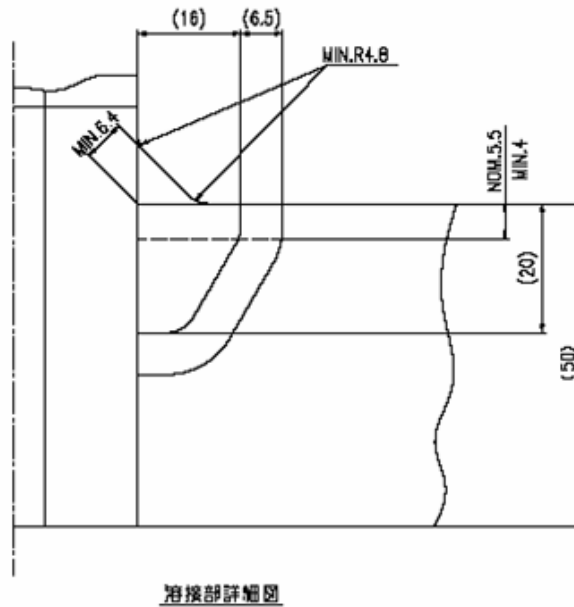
Seal Weld Configuration for PINC 5.13 through 5.16 from JNES
